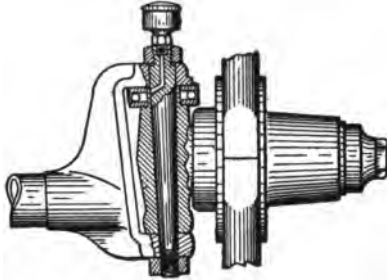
Detail of Steering Knuckle, Rambler Car. Thomas B. Jeffery & Co., Kenosha, Wis.
